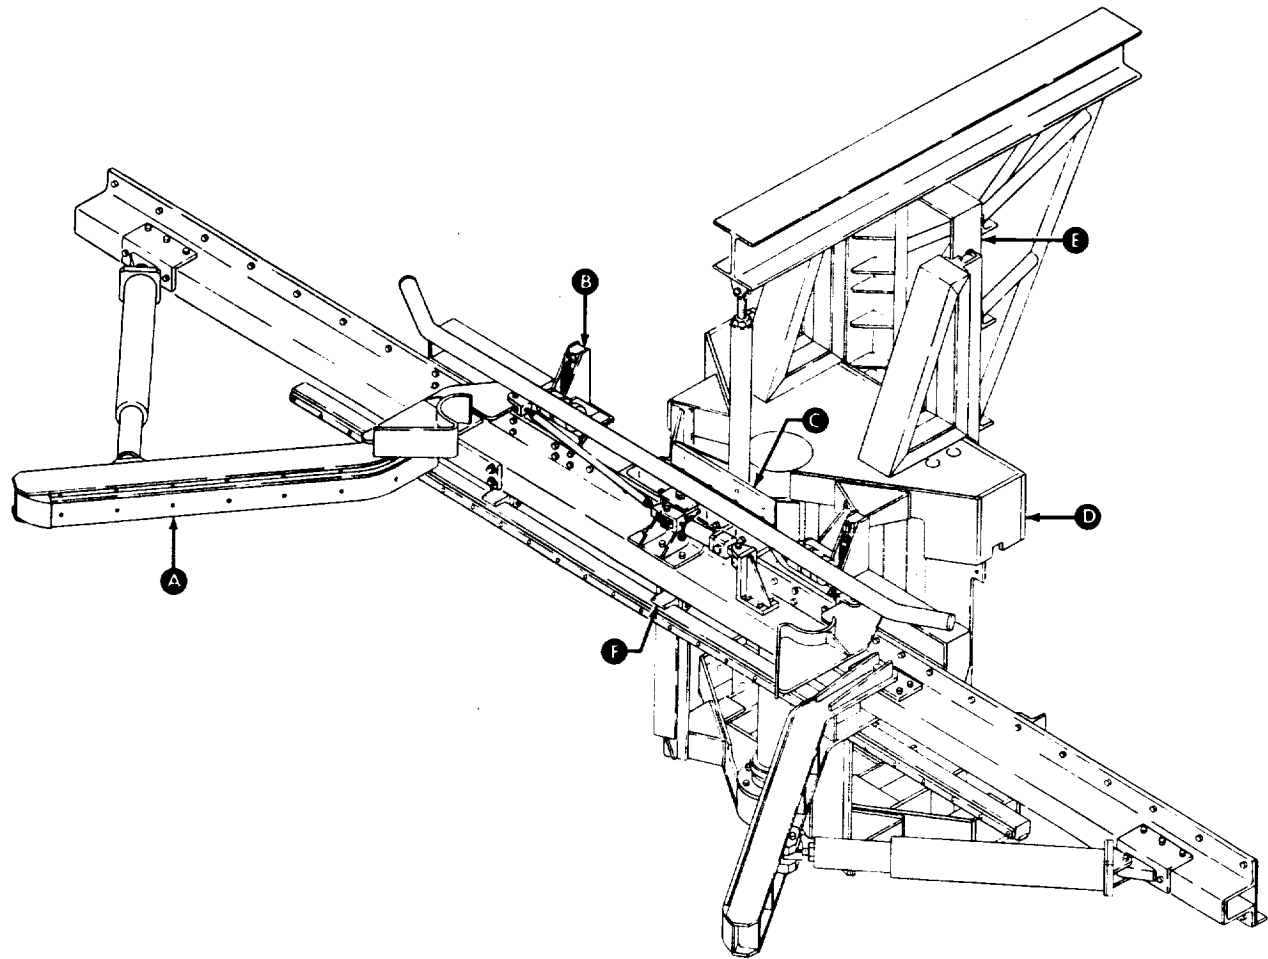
LES Coupler Assembly (Sheet 1 of 9)
